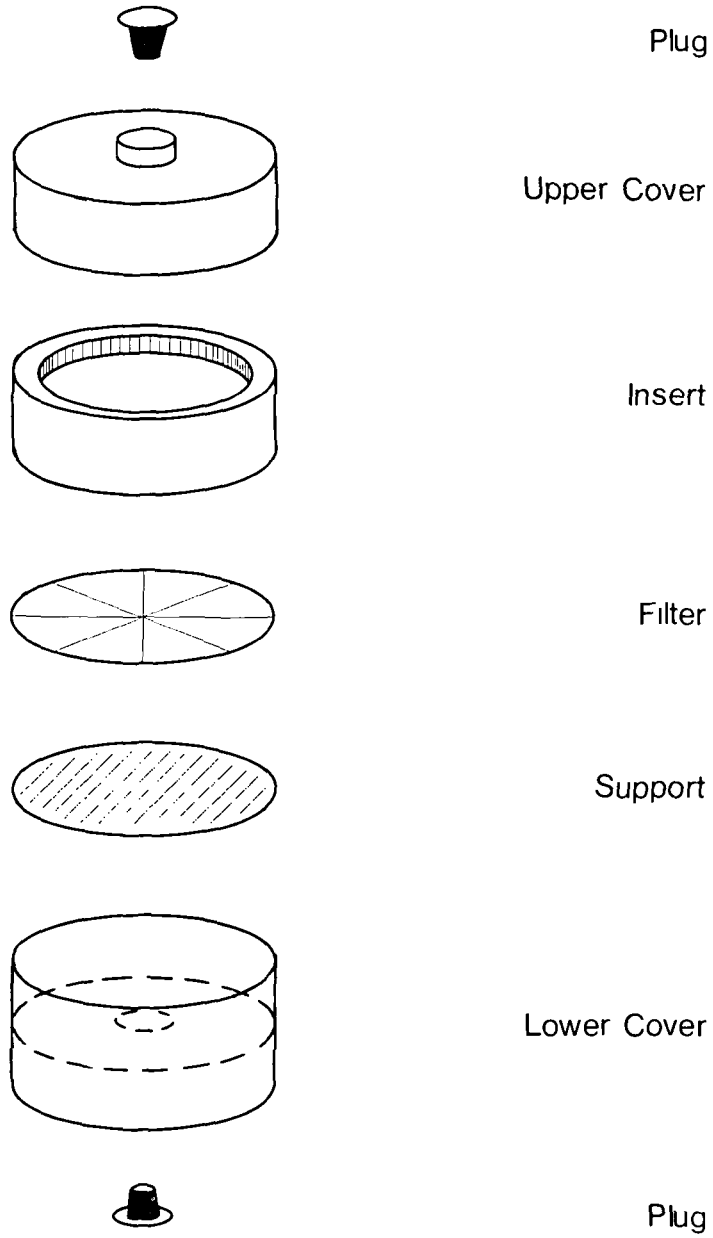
FILTER UNIT - EXPLODED VIEW
